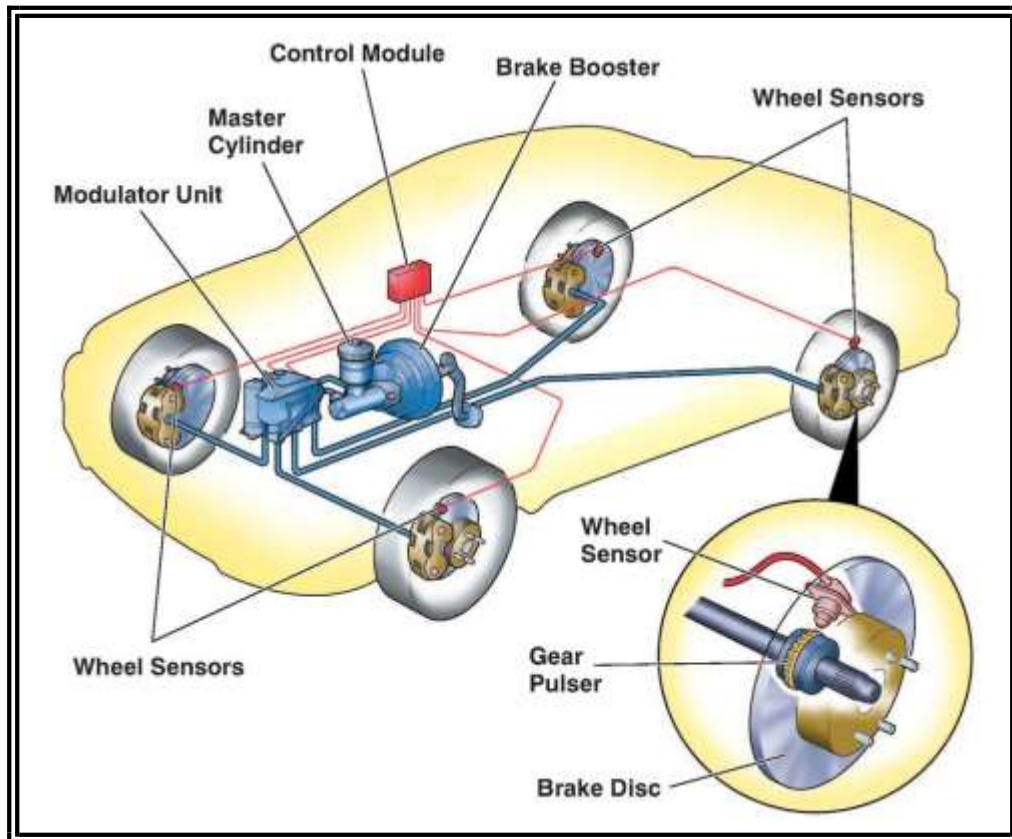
Location of wheel speed sensors, Master Cylinder, Control module in car.
